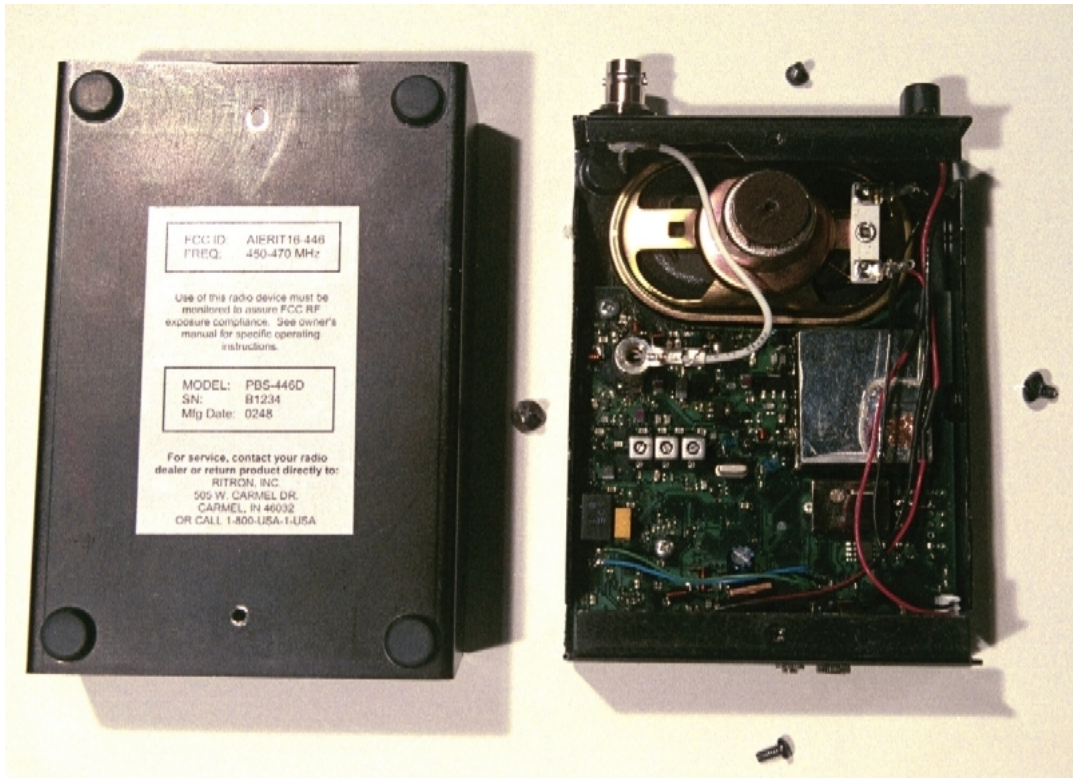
D complete topside PCB assembly
